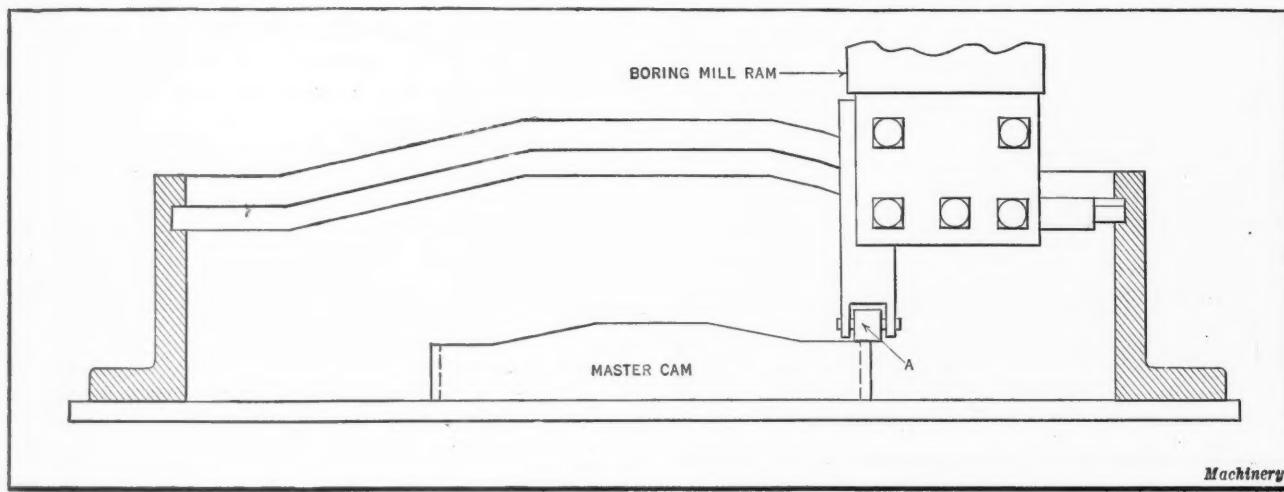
Boring Mill Set-up for cutting Groove in Cam shown in Fig. 2
